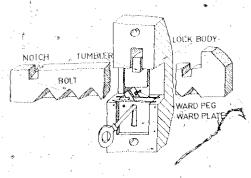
A Toothed-Bolt Lock (bult partly removed)
